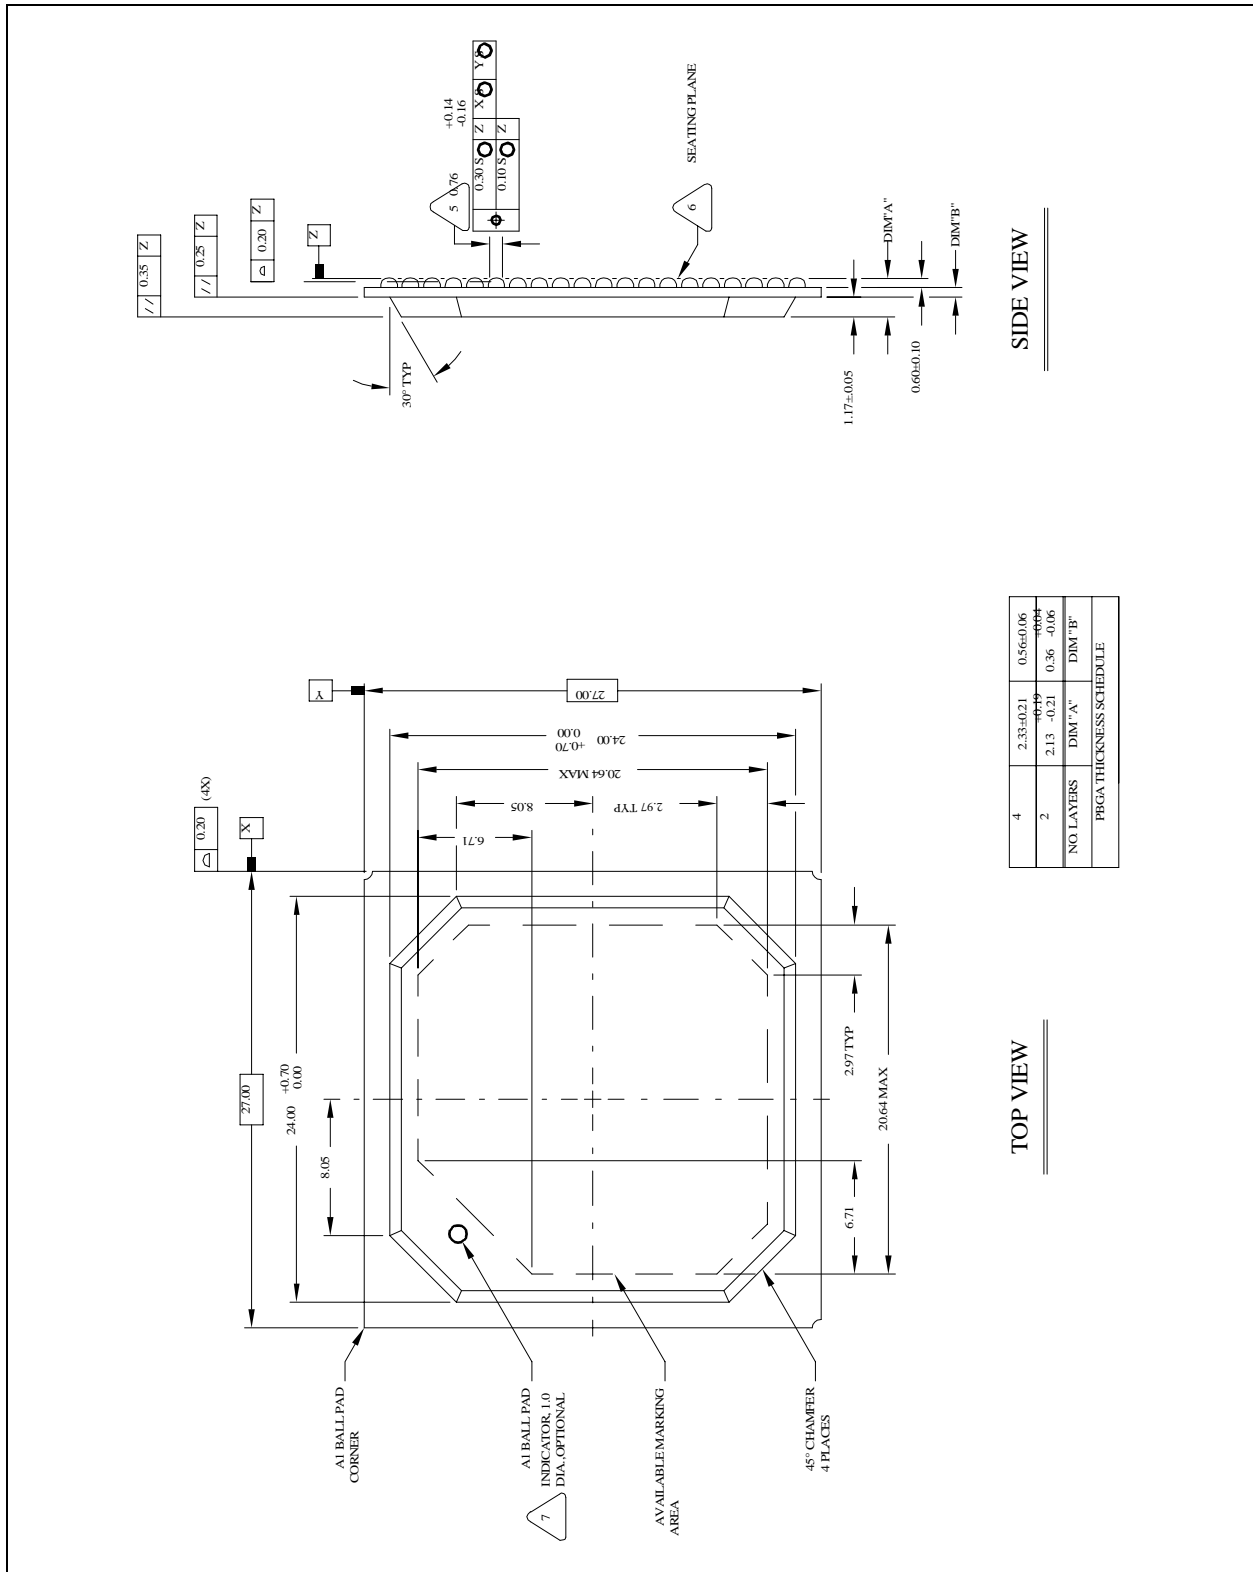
RS8228 Mechanical Drawing (Top and Side Views)
